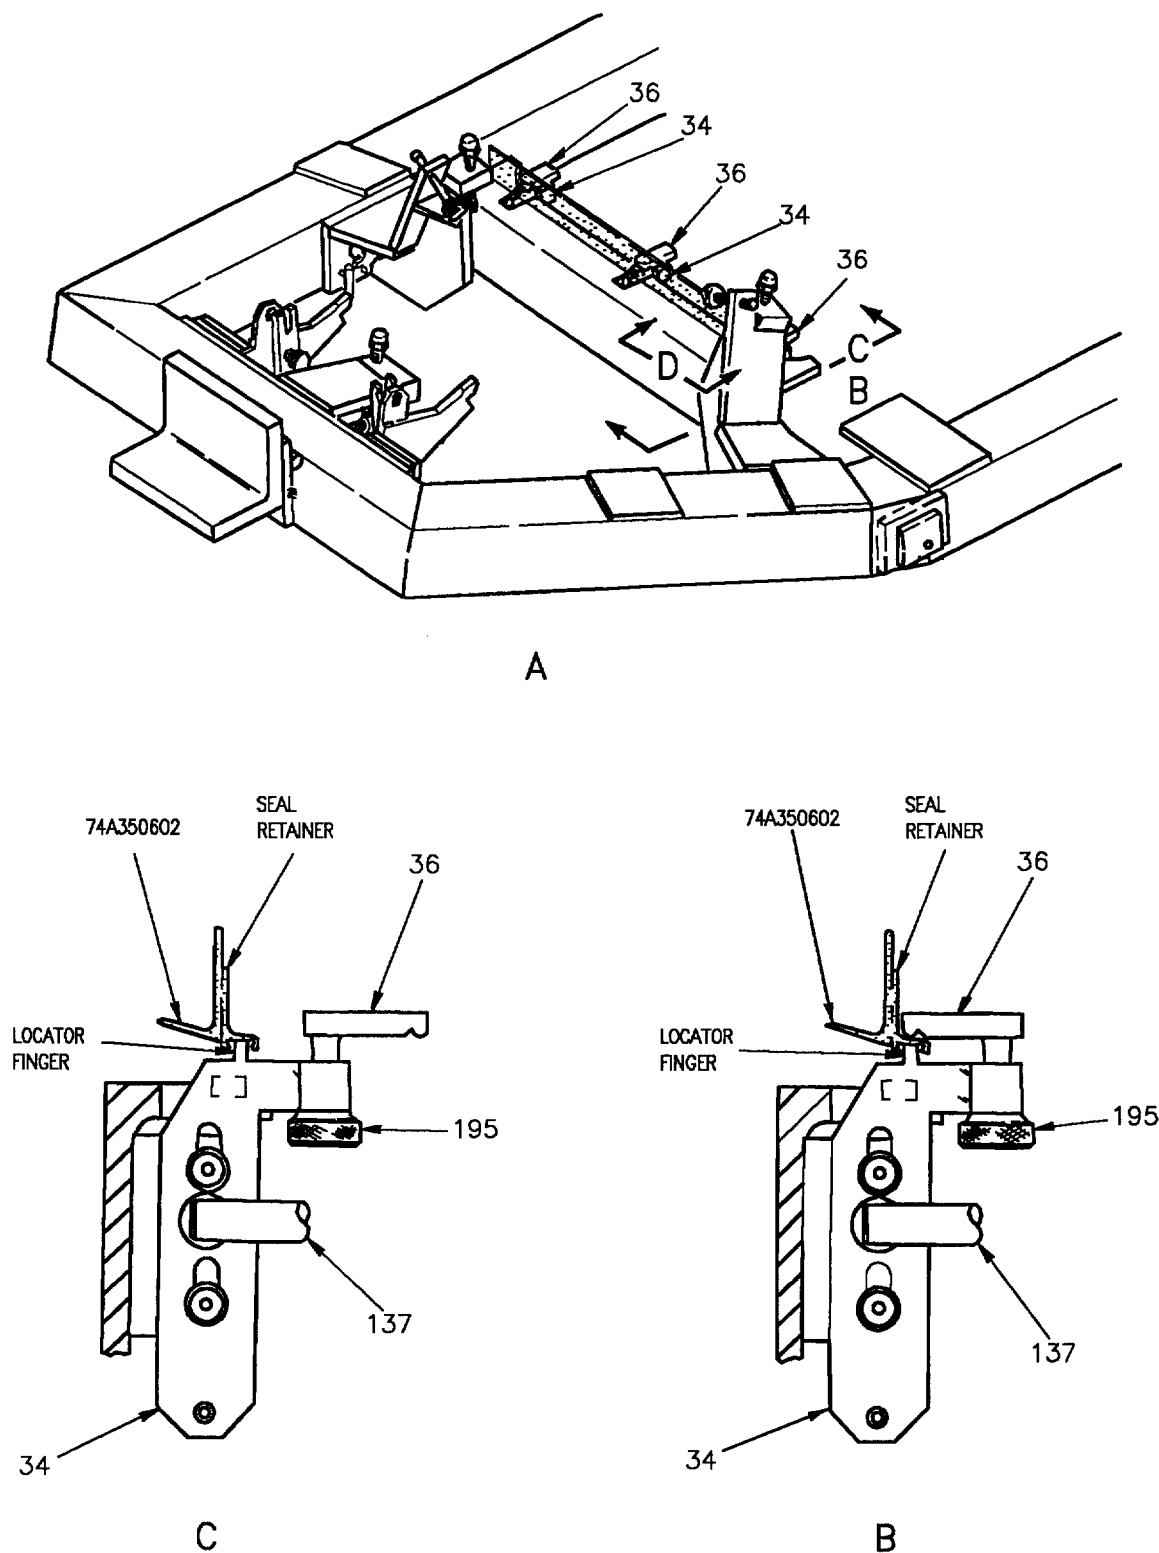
Inspection or Replacement - Seal Retainer (Sheet 2)
